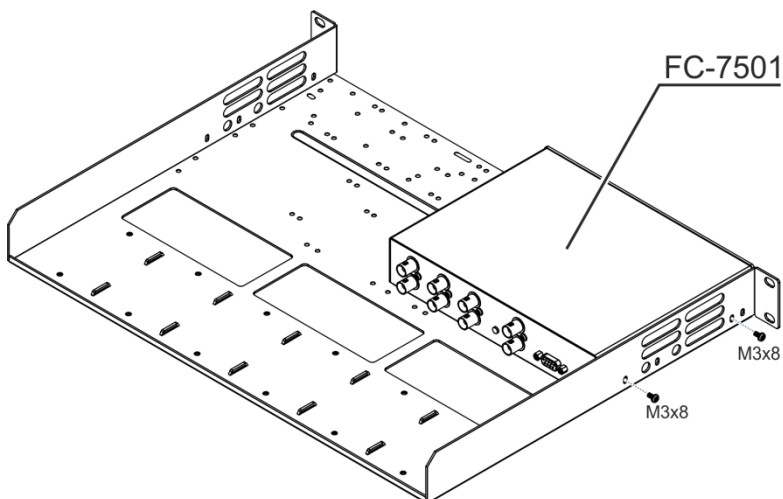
Mounting a half-19" Device via Screws on the RK-6PS Side Panel
